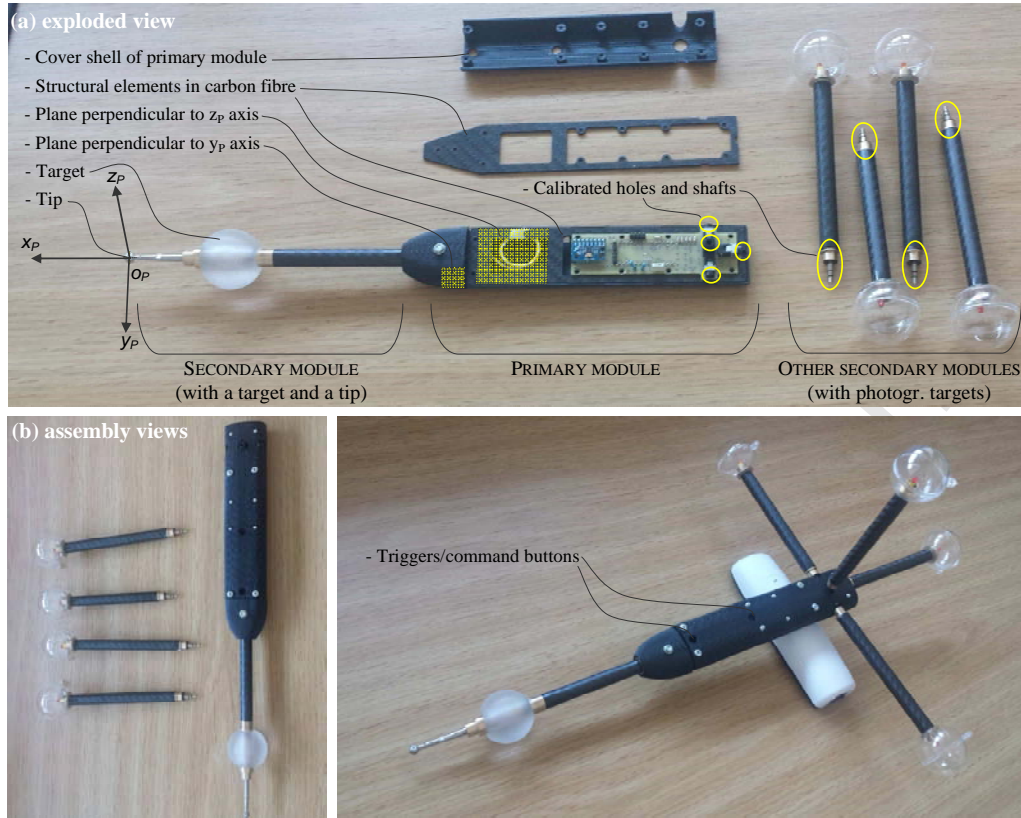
Pictures of a prototype probe, which is still under development at Politecnico di Torino - DIGEP. In these pictures, the prototype is equipped with active photogrammetric targets only.
